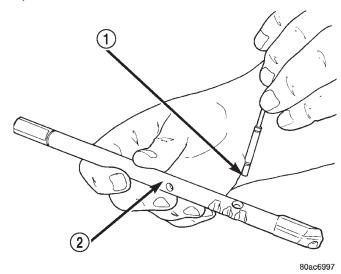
Remove 1-2 Shift Rail Interlock Pin
